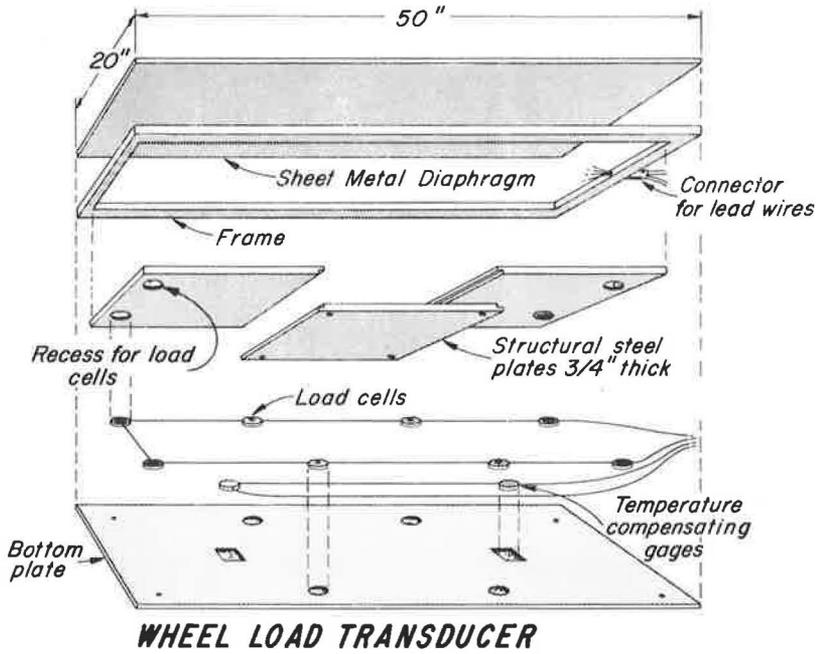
Exploded view of wheel load transducer showing arrangement of plates and load cells.
